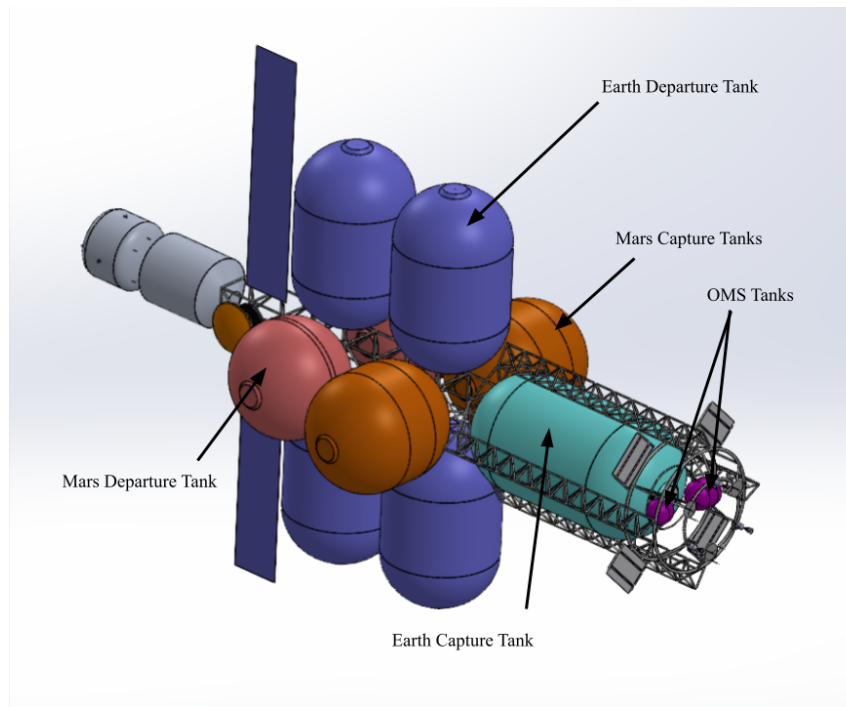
Assembly CAD Diagram with Labeled Tank Locations
